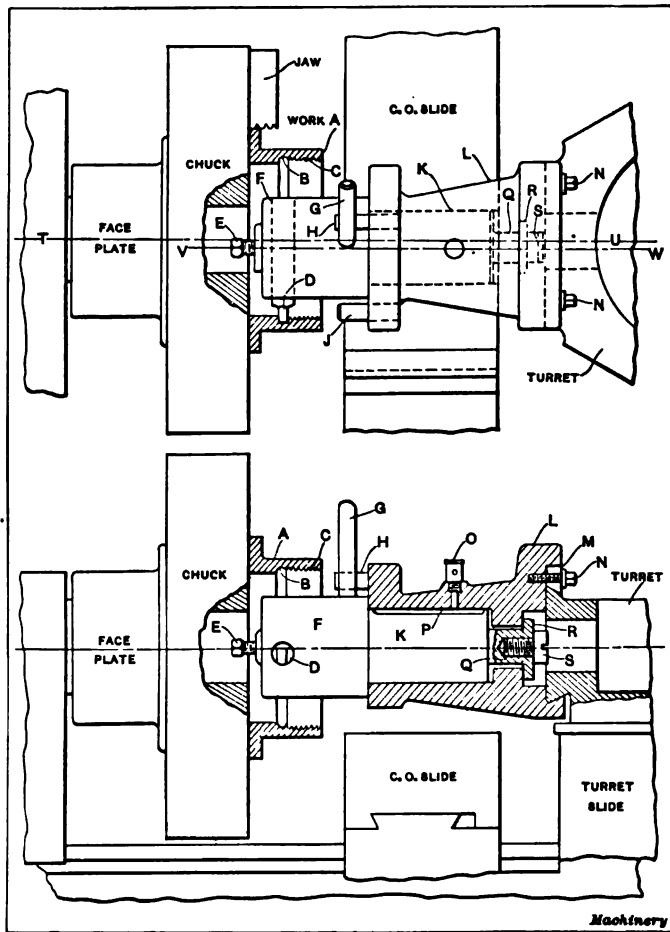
An Eccentric Recessing Tool for the Turret Lathe
